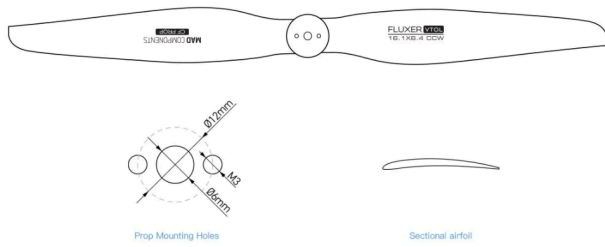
Cross-sectional shape and other dimensions of Fluxer VTOL Propeller blade [7].
